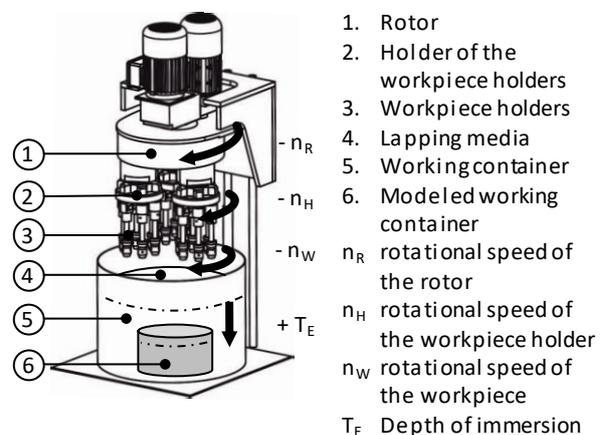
Machine tool DF-3 tools with the machine kinematic and visualisation of the container sizes for the simulation model
